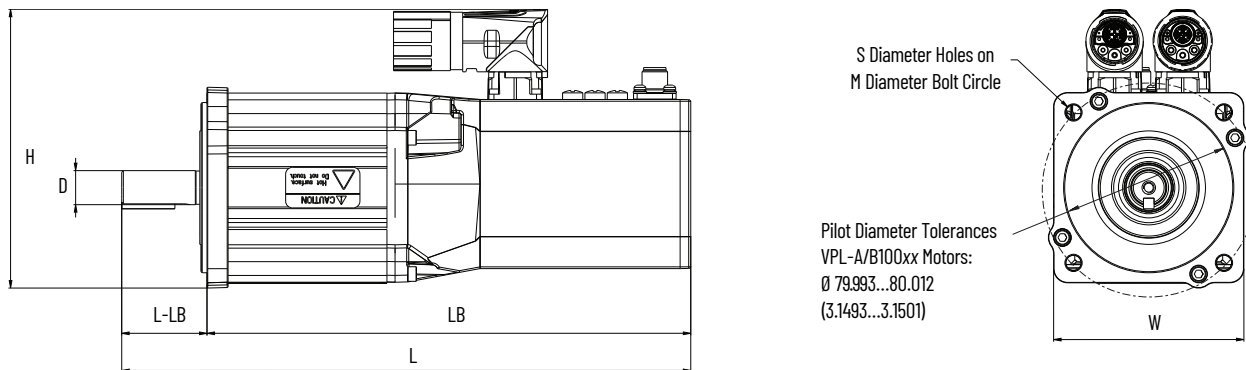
DSM Dimensions, 75 mm Frame Size
